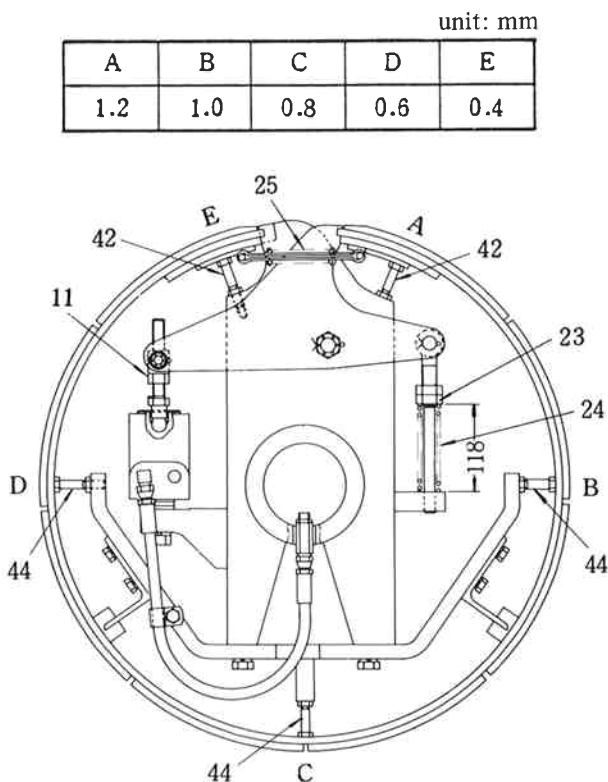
Main (Front and Rear) Drum Clutch Adjustment
